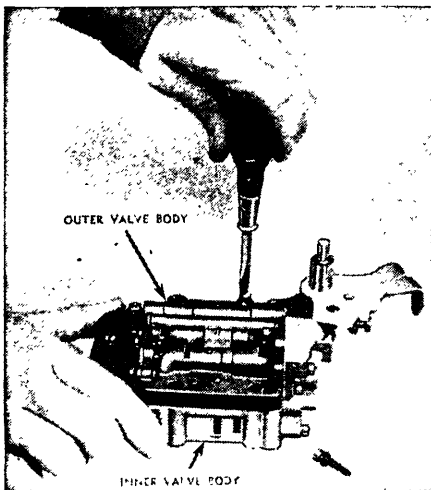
Separate inner and outer valve body (2 screws) and remove spacer plate
